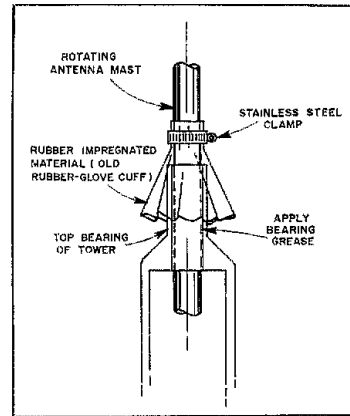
Illustration of the protective cover used by WB2YKX to weatherproof the thrust bushing on his tower.
